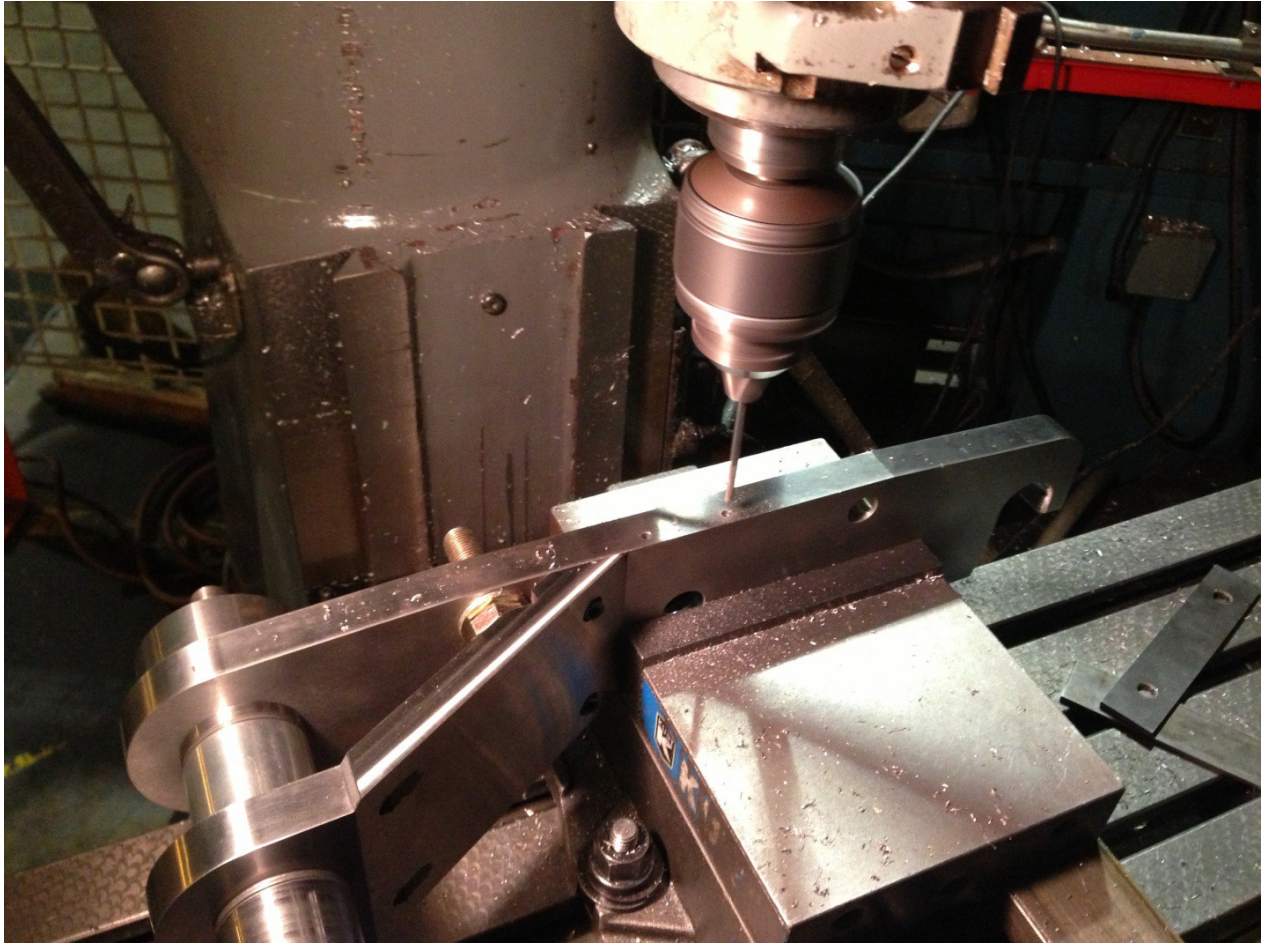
Drilling horizontal crossbar for tapped holes on a manual mill at Cal Poly ME SPL.
